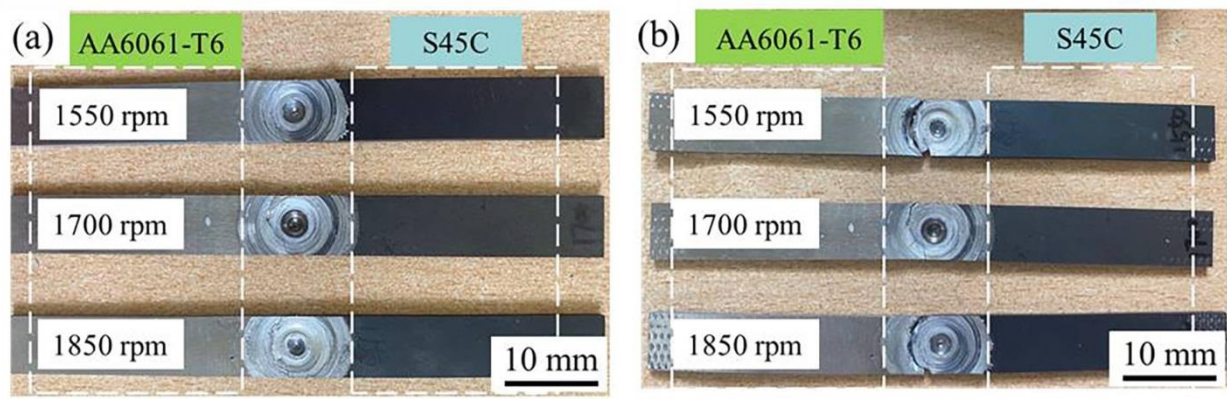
(a) Machined joint specimens and (b) tensile fractured specimens
